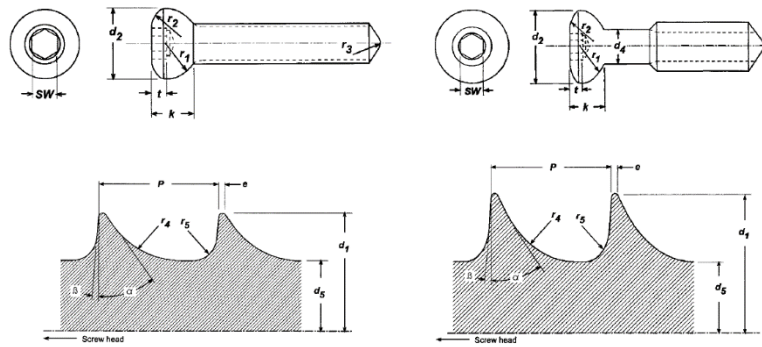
Schematic representation of screw types and threads: Type HA (left), Type HB (right) [64].
